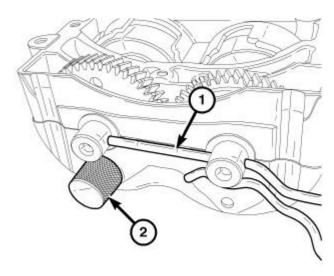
Balance Shaft Timing Tool Courtesy of CHRYSLER LLC
